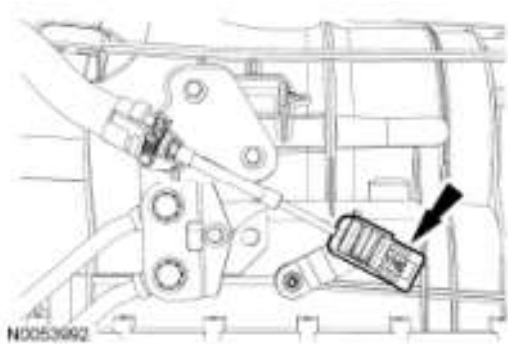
Identifying Plastic Starter Motor Electrical Connector Cap
